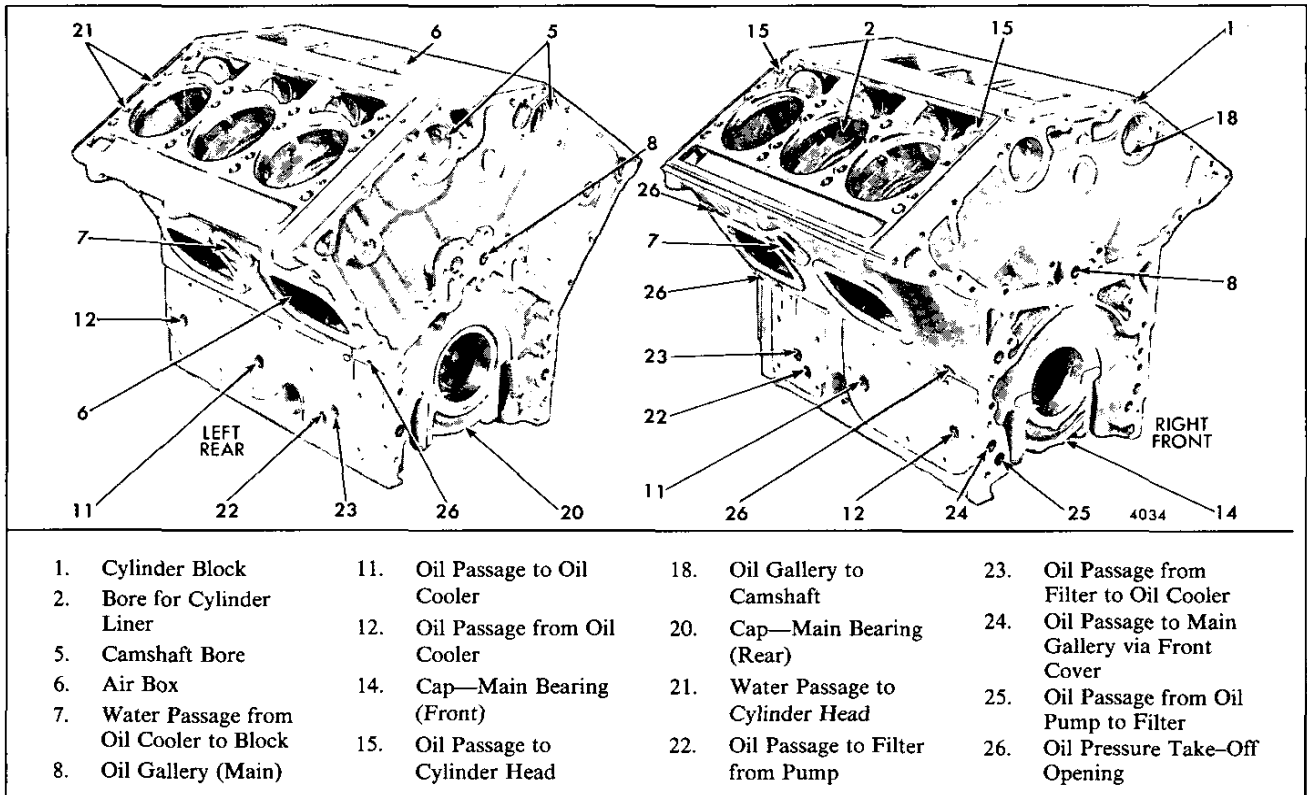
Cylinder Block (6V-53 Cast Iron Cylinder Block Shown)
